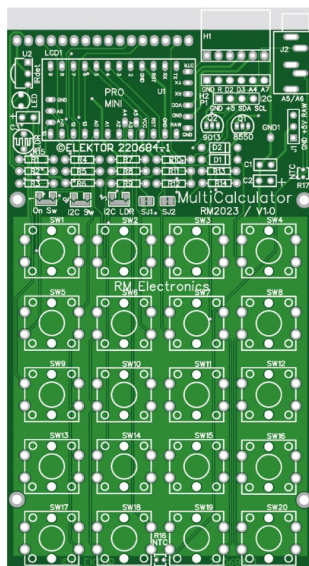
MultiCalculator PCB top overlay (PCB 220684-1 v1.0).
